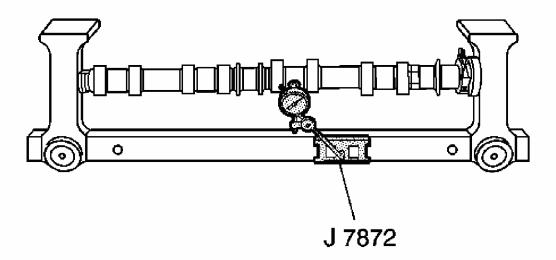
Measuring Camshaft Lobes For Wear Courtesy of GENERAL MOTORS CORP.
